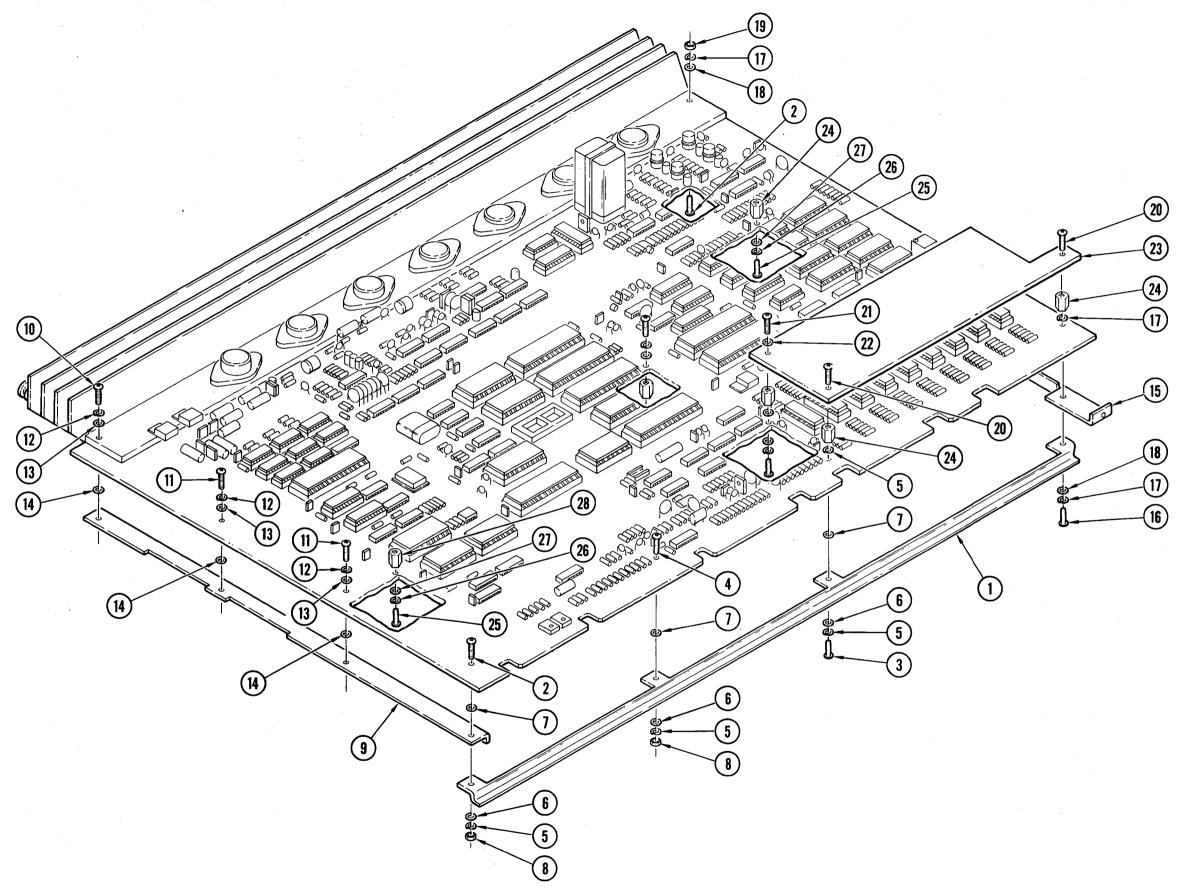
Drive Formatter Printed Wiring Board Assembly (Exploded View)
